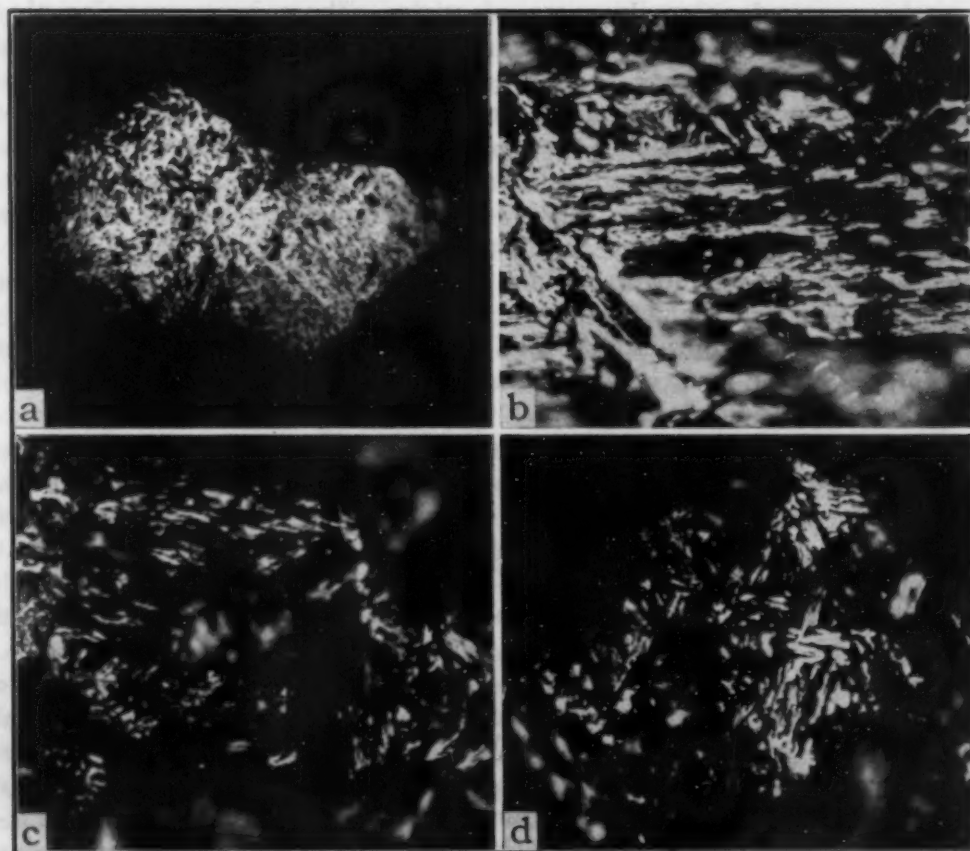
Fracture Surfaces of E.N. 23 and E.N. 8 Steels.  $\times 430$ . (See Table II.)
